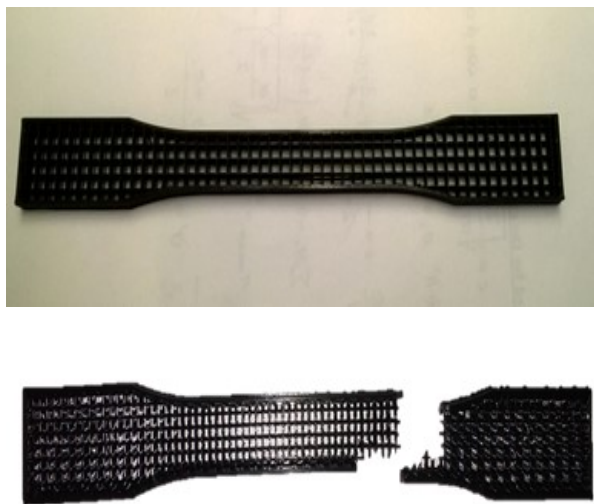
Images showing the 3D printed parts a) before and b) after tensile testing.
